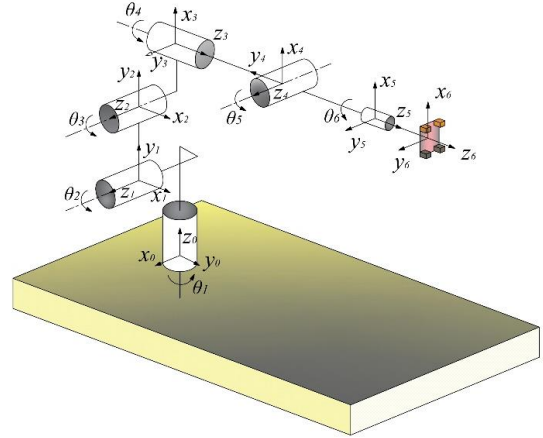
The mechanism diagram of the six-axis industrial robot.
